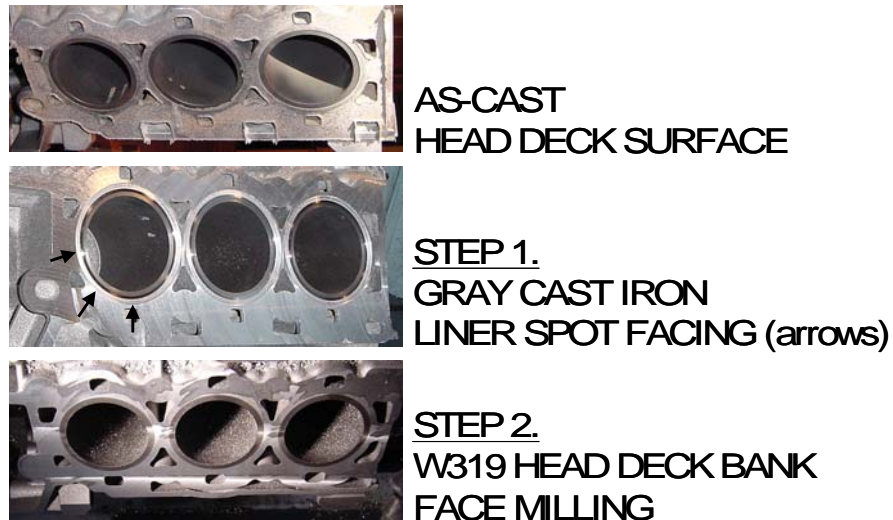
3.0L V6 sand cast W319 engine block right hand head deck surface indicating the as-cast head deck condition, the liner 'spot facing' operation and the fully face milled 'cubed' head deck condition.
